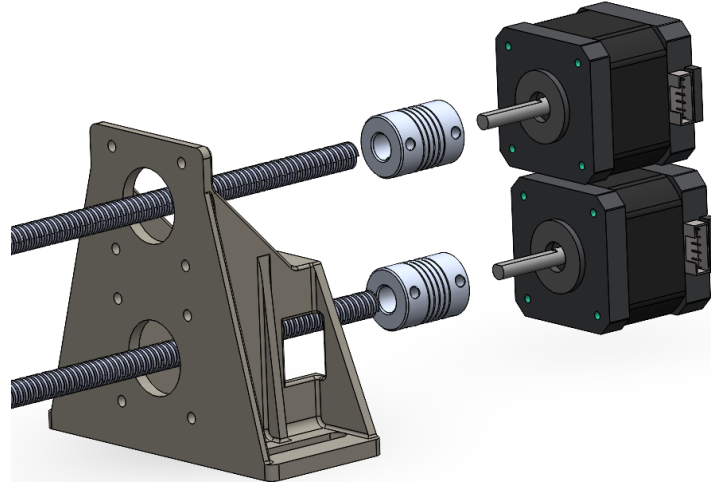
Exploded view: two NEMA motors on a mount with flexible coupling and lead screw.
